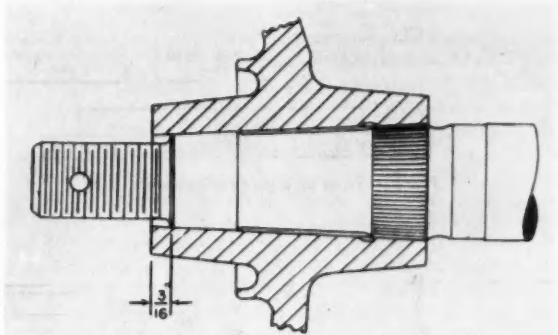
Hub is assembled to shaft by applying 27,000-psi pressure. This presses serrations into hub, making a click-free assembly. Check with air-leak gage insures perfect seat of hub taper to shaft taper.
